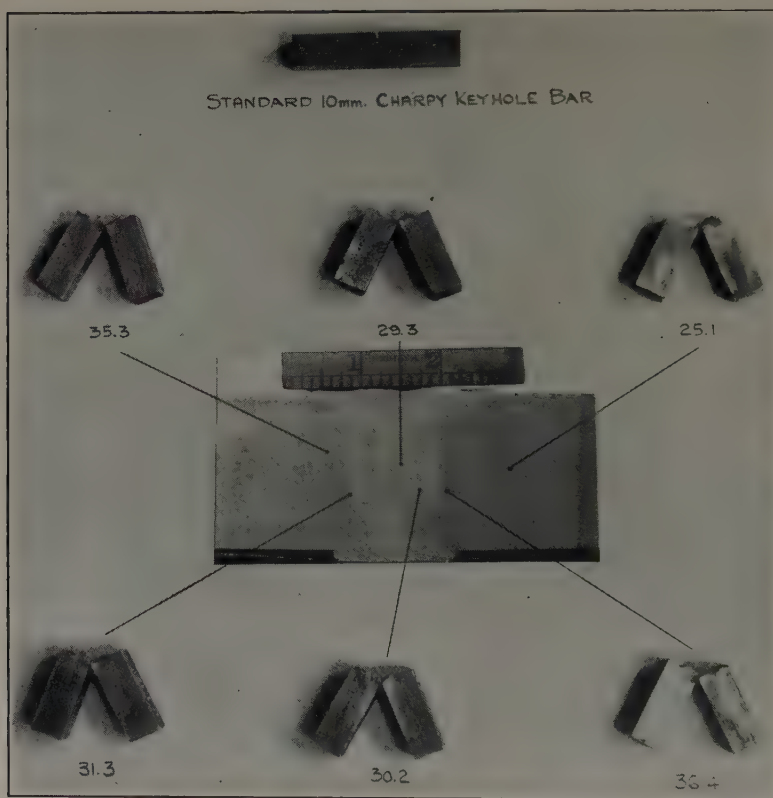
CHARPY IMPACT VALUES OF CLASS I CARBON-STEEL WELD, ADJACENT AREAS AND PLATE.
